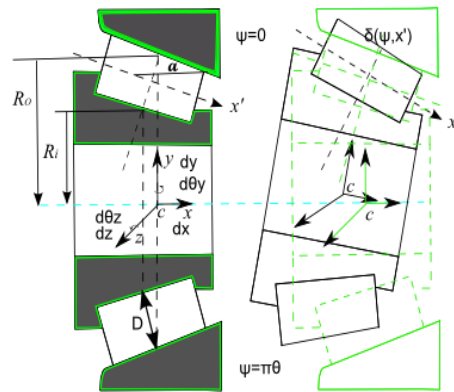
1 Geometric relation in taper roller bearing (Houpert)
